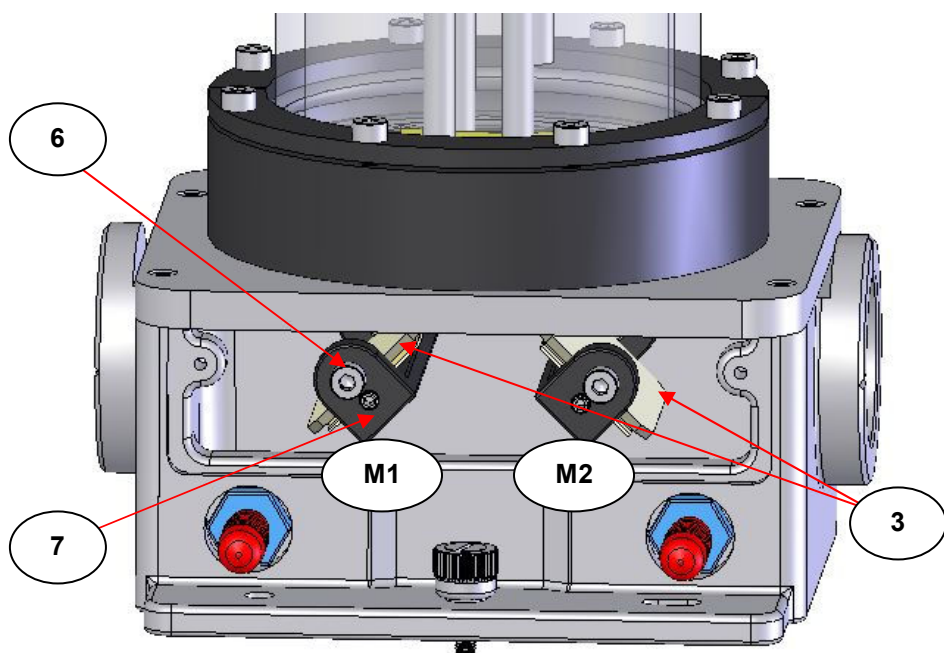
Tornado™ Gas Cell Optical Unit with Cover Plate Removed
